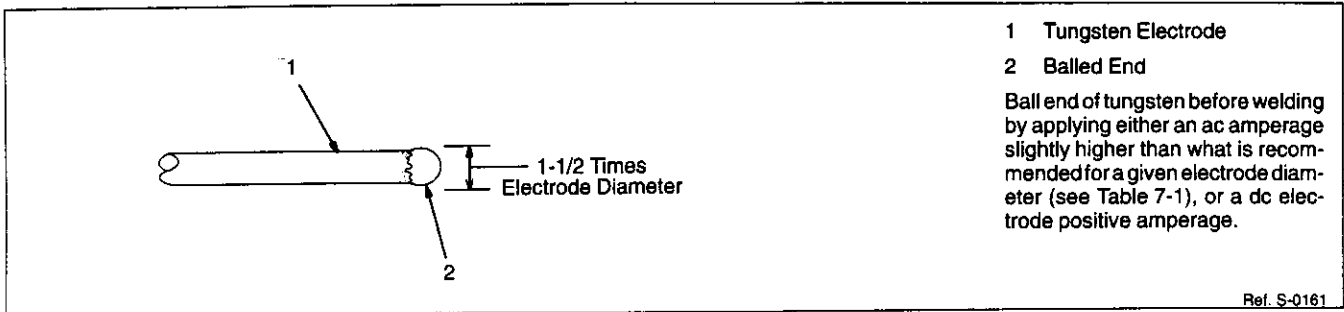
Preparing Tungsten For AC Or DC Electrode Positive (DCEP) Welding
